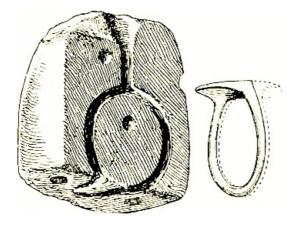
Part of Mould for a Ring of the shape indicated (No. 532).
